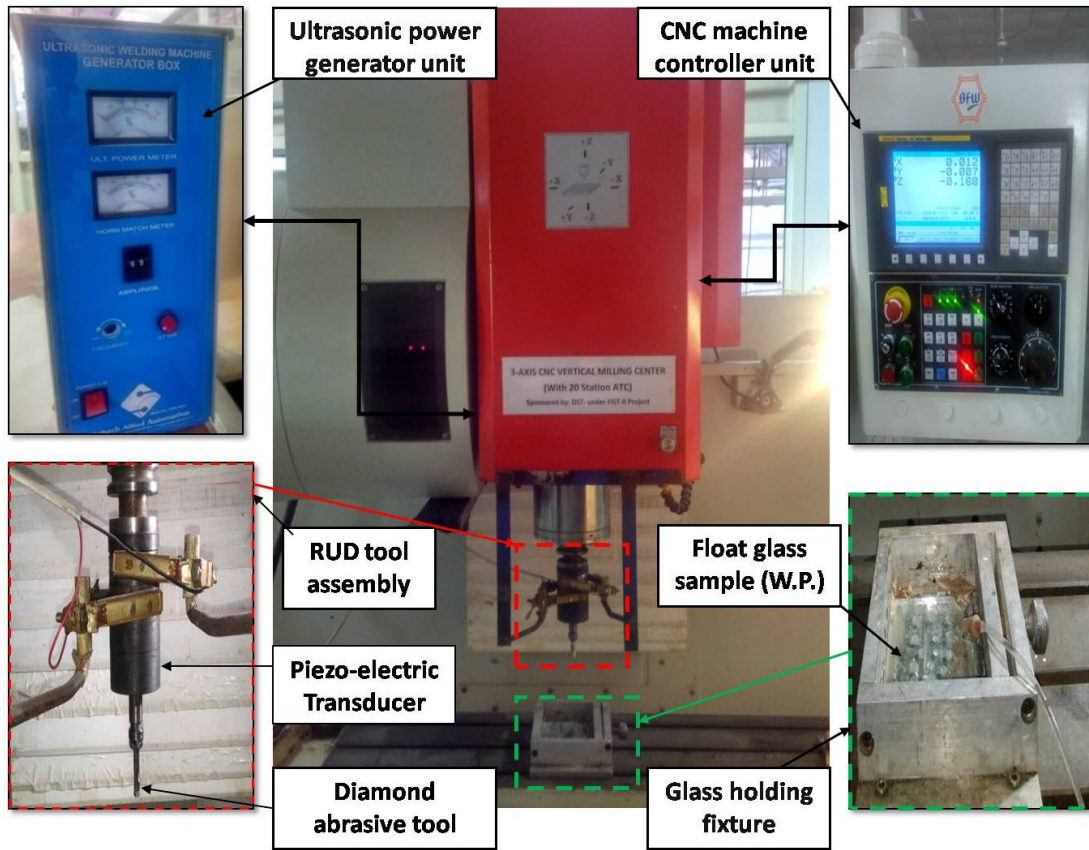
A schematic flow diagram shows the RUM experimental setup and equipment used for generating blind and through holes
